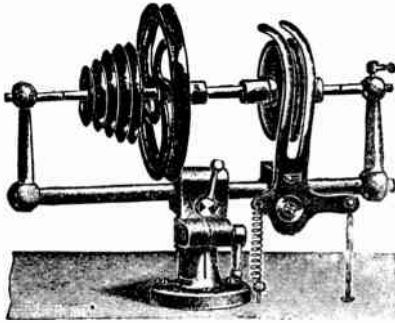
SMALL COUNTERSHAFT TO FIX ON BENCH.
